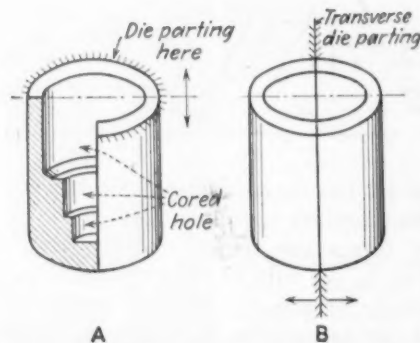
Simplest die parting, A, would be located across upper open end. Middle parting, B, raises costs.
